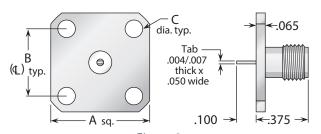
(11/16" square flange, interchangeable with BNC and TNC standard flange size)
